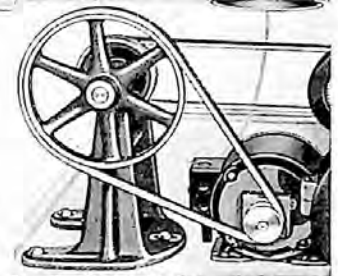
Fig. A. Horizontal Motor Drive Countershaft, Plain Type
